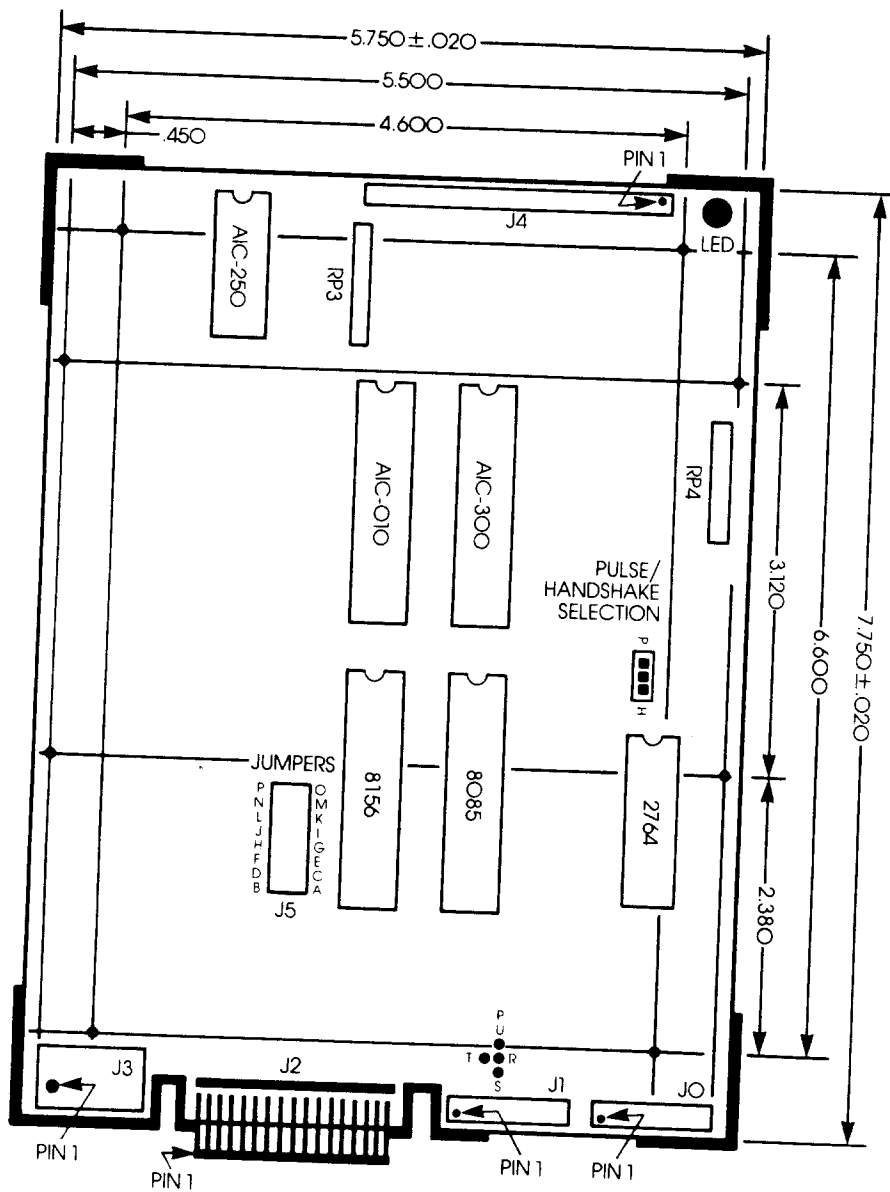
ACB-4000A BOARD LAYOUT
